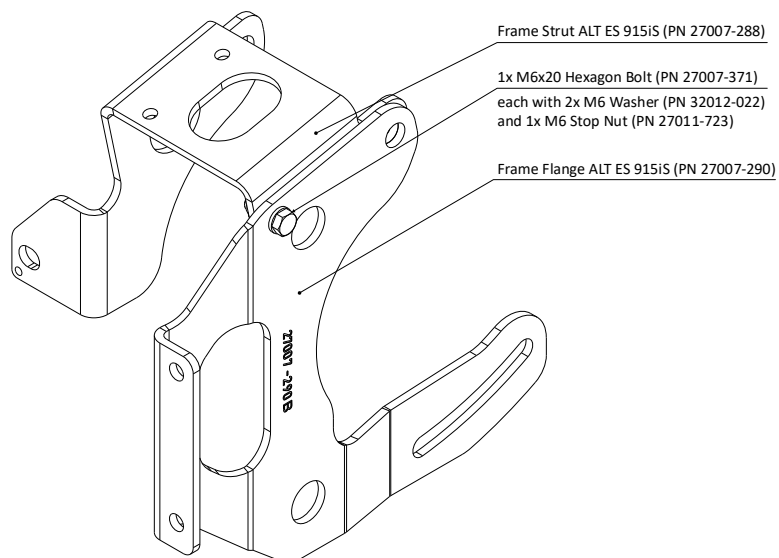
Isometric View Ext. Double Alternator Kit 2x 70A Rotax 916iS Frames Bank2
